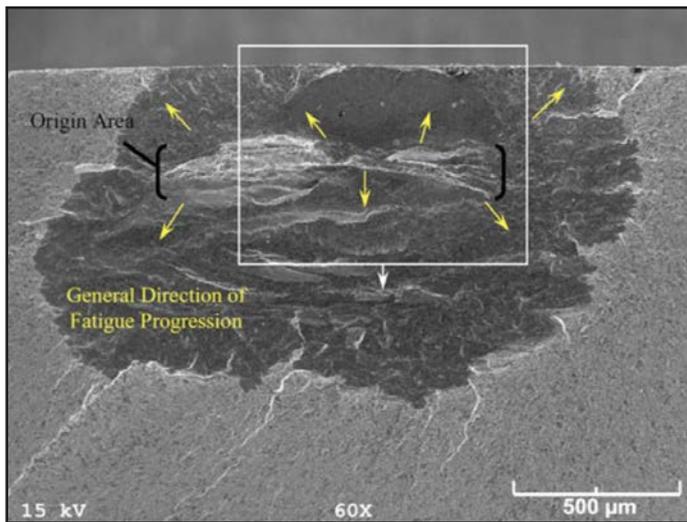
Opened axial crack on intermediate bearing INT-B IR.
